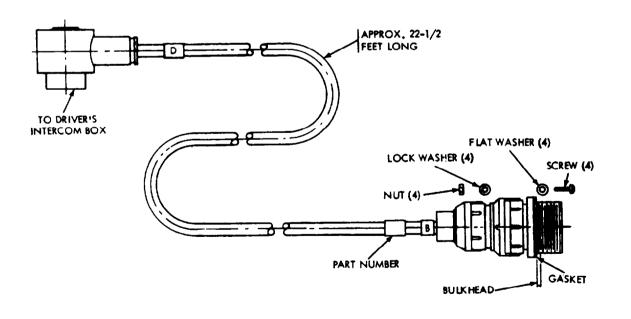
Removal/installation -driver's intercom-to-head cable assembly (1 of 2).
